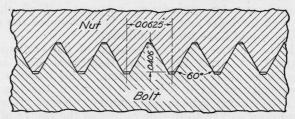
Section of the American National fine thread for a bolt having a diameter of ¾ inch.
